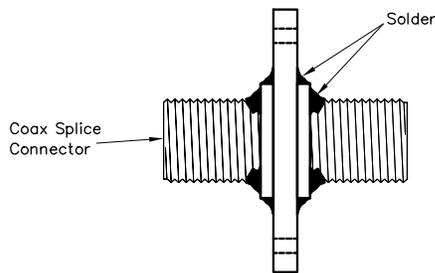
Feedthrough connector for coax line. An Amphenol 83-1J (PL-258) connector, the type used to splice sections of coax line together, is soldered into a hole cut in a brass mounting flange. An Amphenol bulkhead adapter 83-1F may be used instead.
